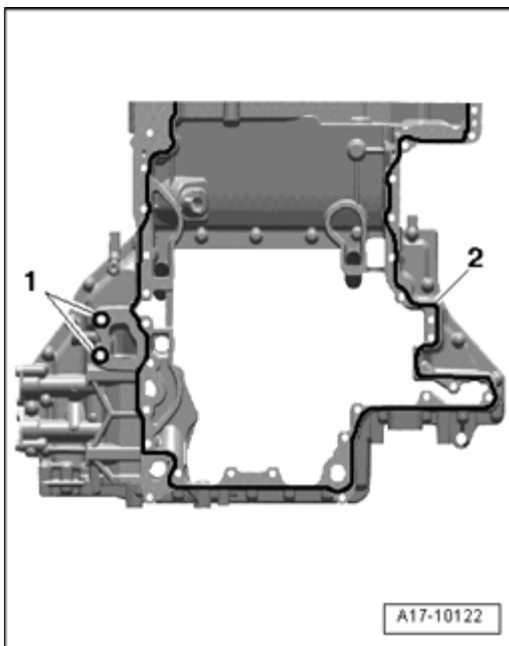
Applying Sealant Beads On Clean Sealing Surfaces Of Upper Part Of Oil Pan
